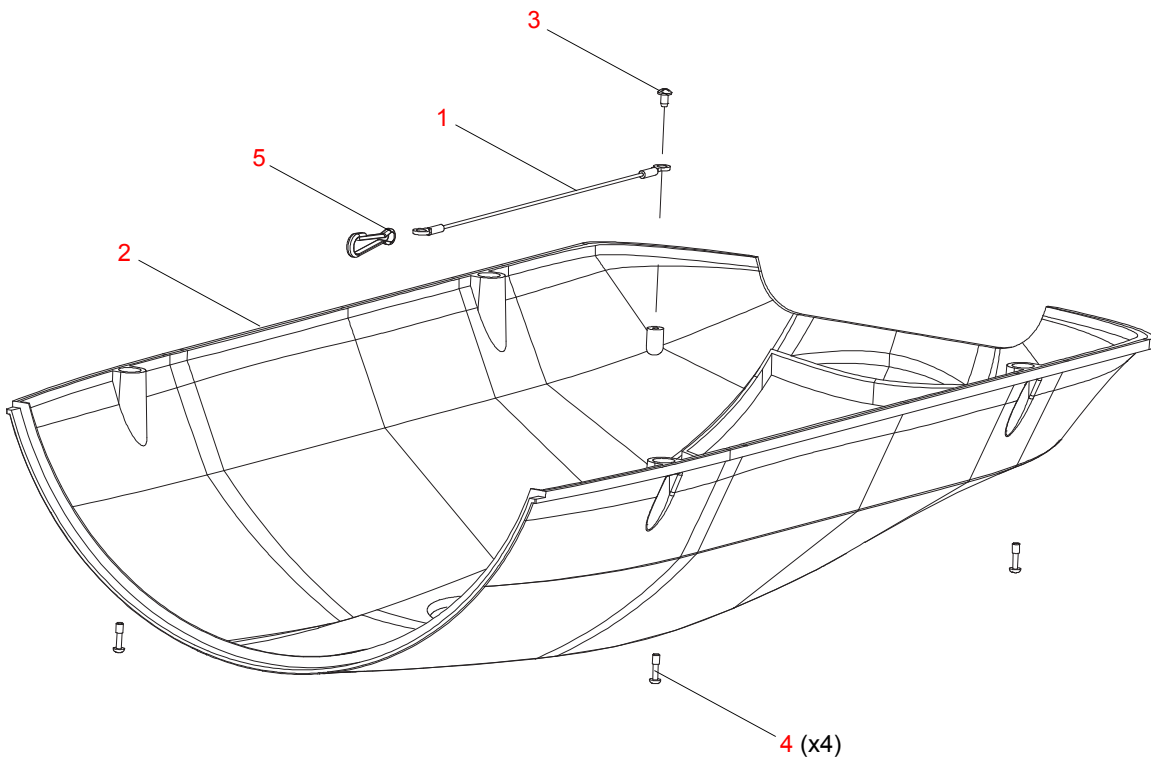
VL4000 BeamWash Head Cover Assembly
